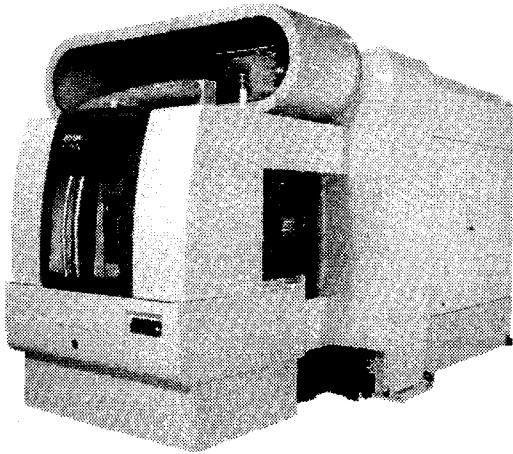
High Speed Machining Center with Linear Motors (MAZAK)
